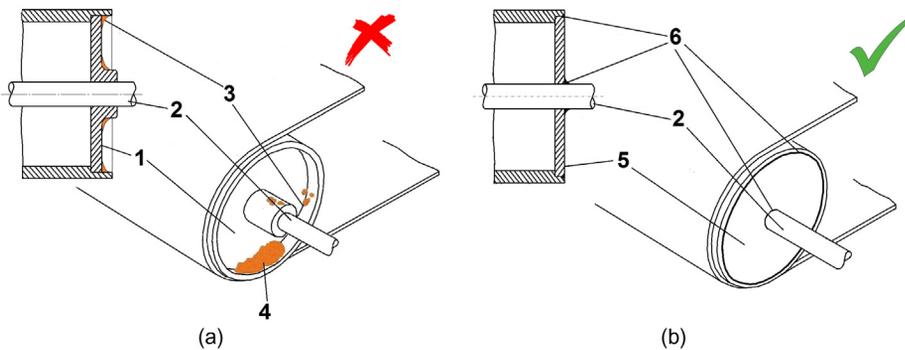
(a) Pressed-in roller ends (1) create dead areas and crevices (3), where residues of product and soil (4) may accumulate. (b) Flush roller ends (5) which are properly welded (6) to the roller and to the shaft (2) avoid any hazard and can be cleaned easily (CFPRA, 1983; Hauser et al., 2004b).
